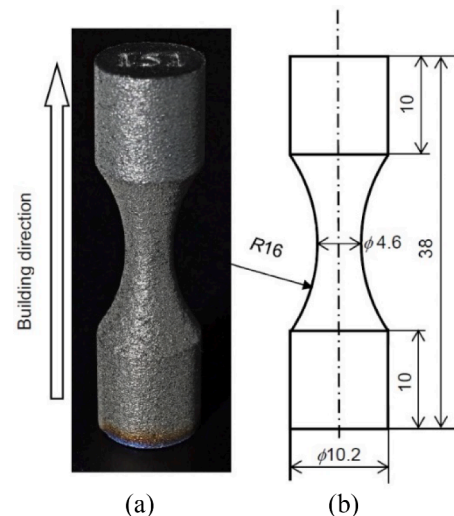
Fatigue specimen: (a) Photograph of the as-built specimen before post-processing. (b) Dimensions of the as-built specimen (unit: mm).
